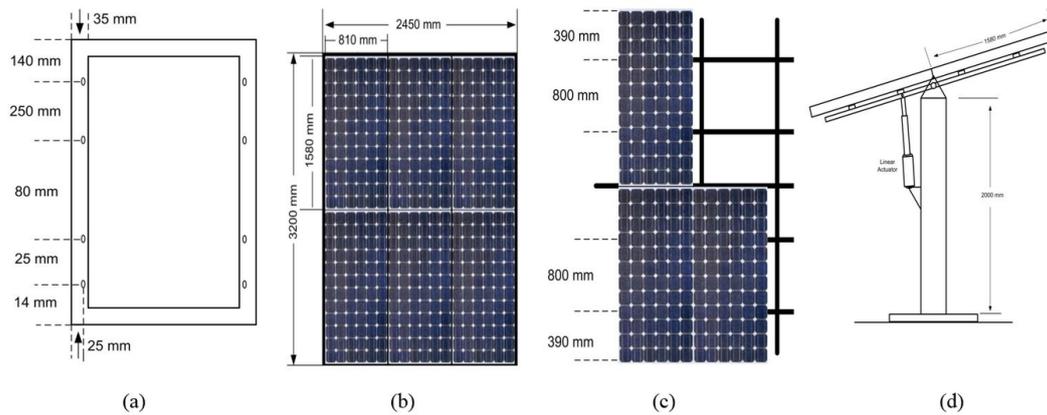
Mechanical design and models; (a) PV module dimensions, (b) platform design and dimensions, (c) mounting cage and installation model, (d) mechanical test design of the tracker
